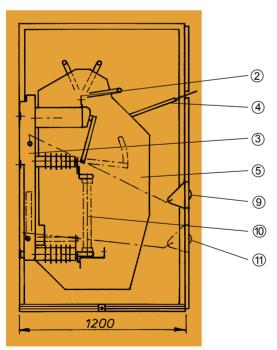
36 kV Transformer feeder panel with fuseswitch-disconnector H 29 SEA
